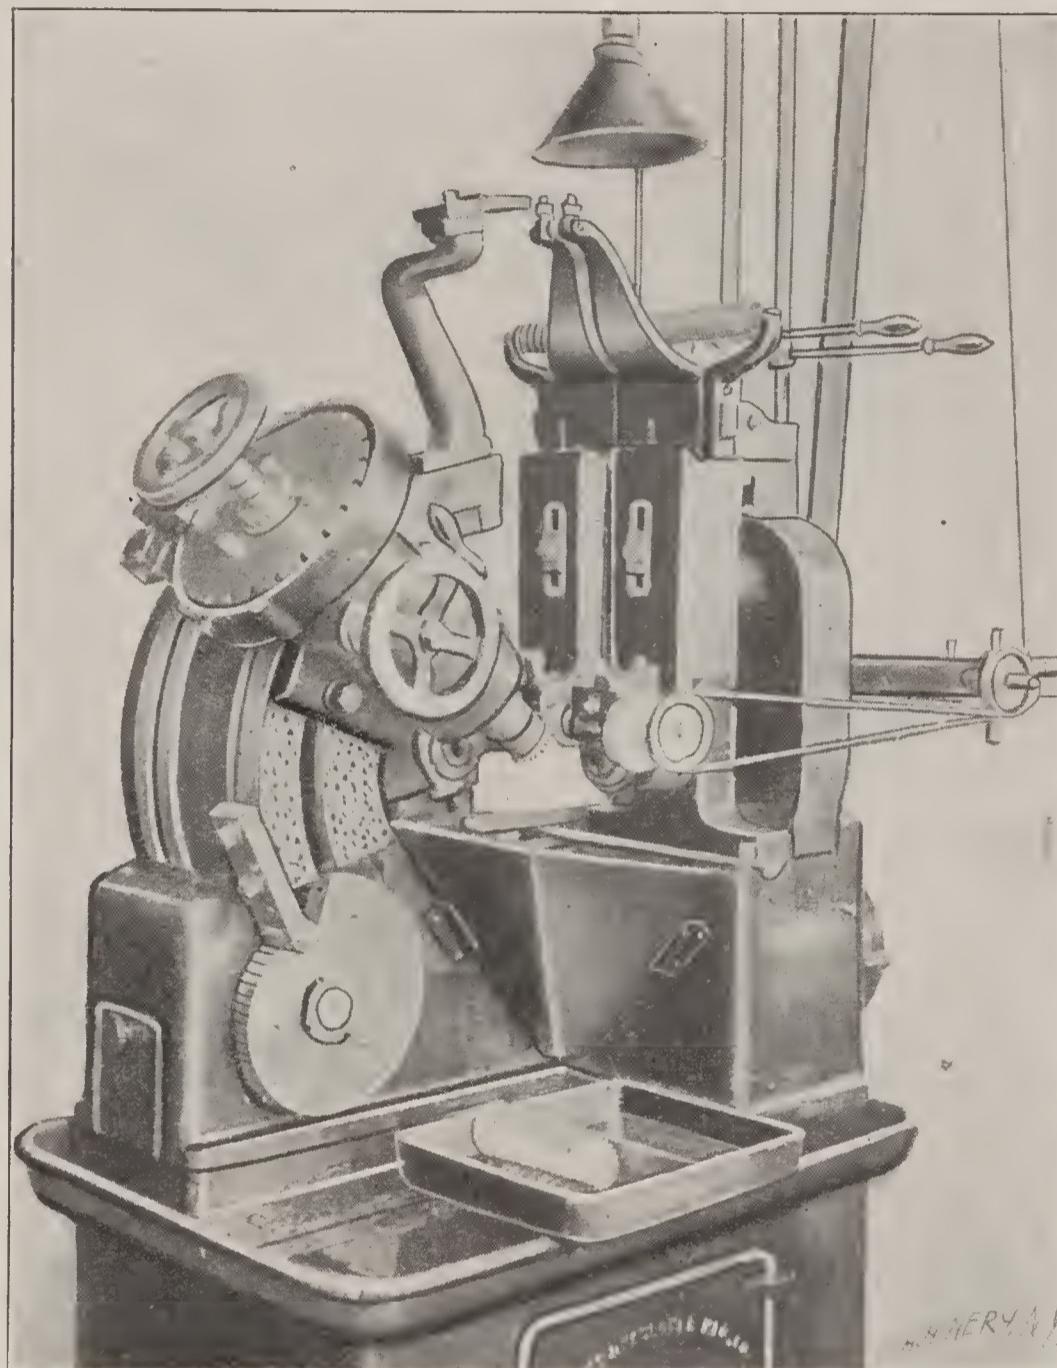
Bevel-gear Milling Machine of the Templet Type
